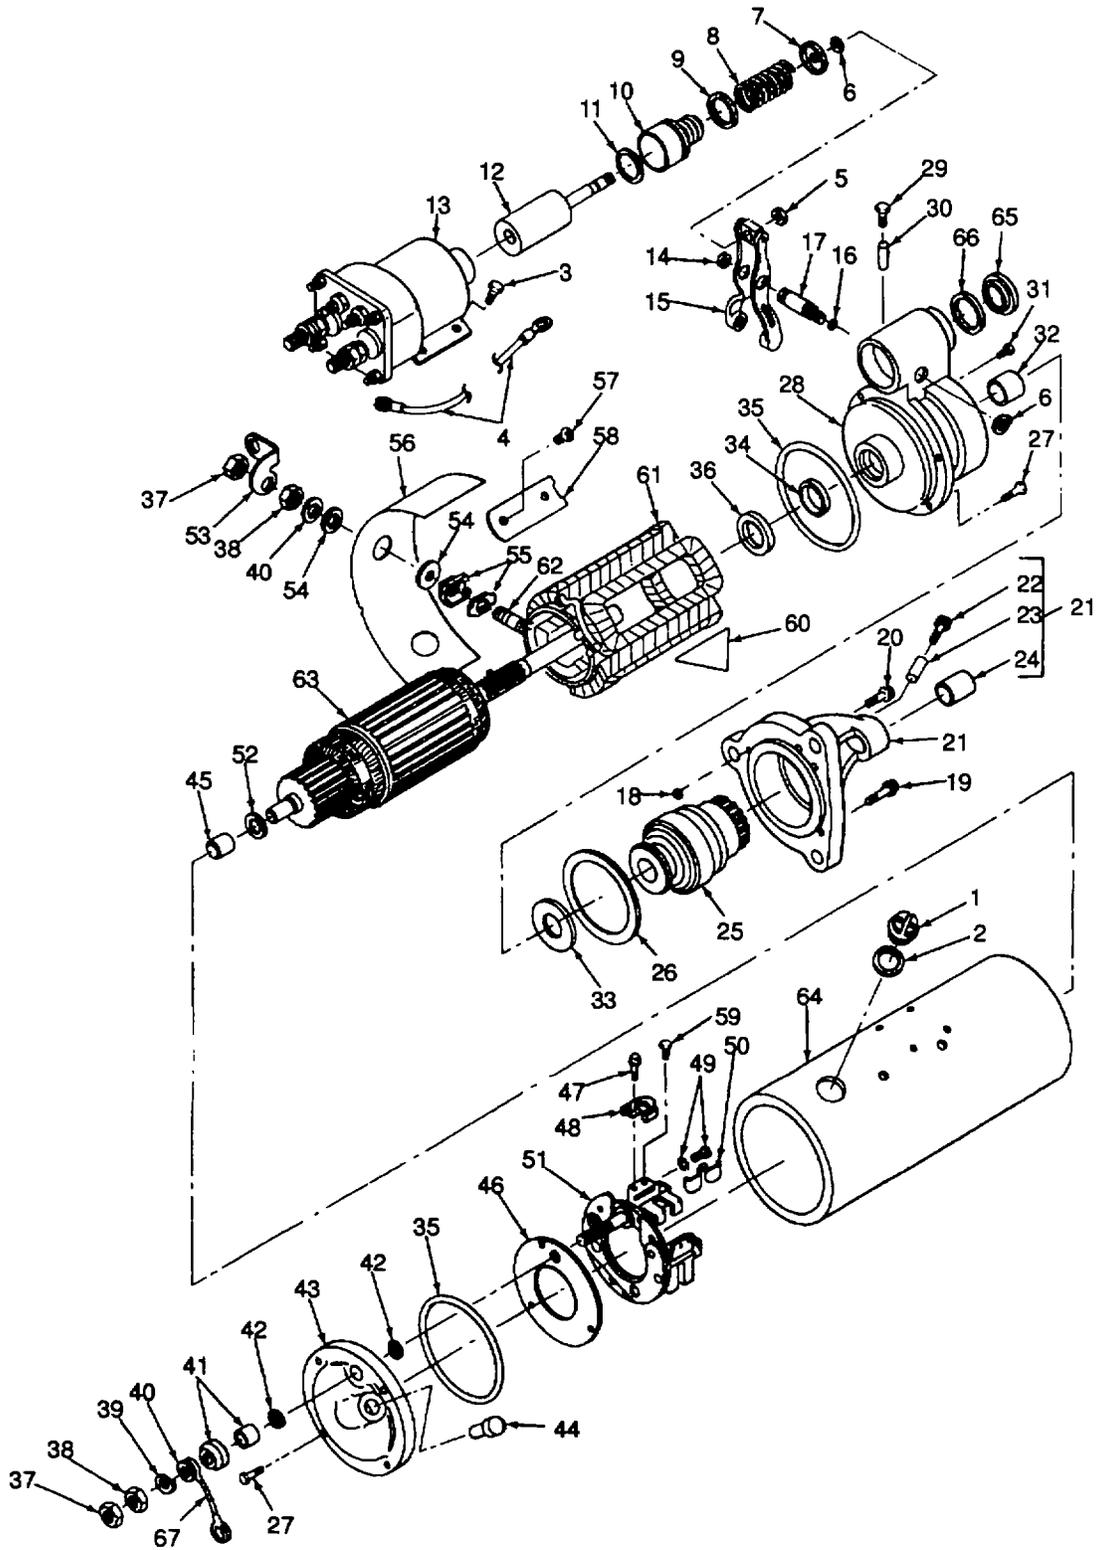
Starter Motors B1 and B2 and Related Parts (Sheet 1 of 2)
